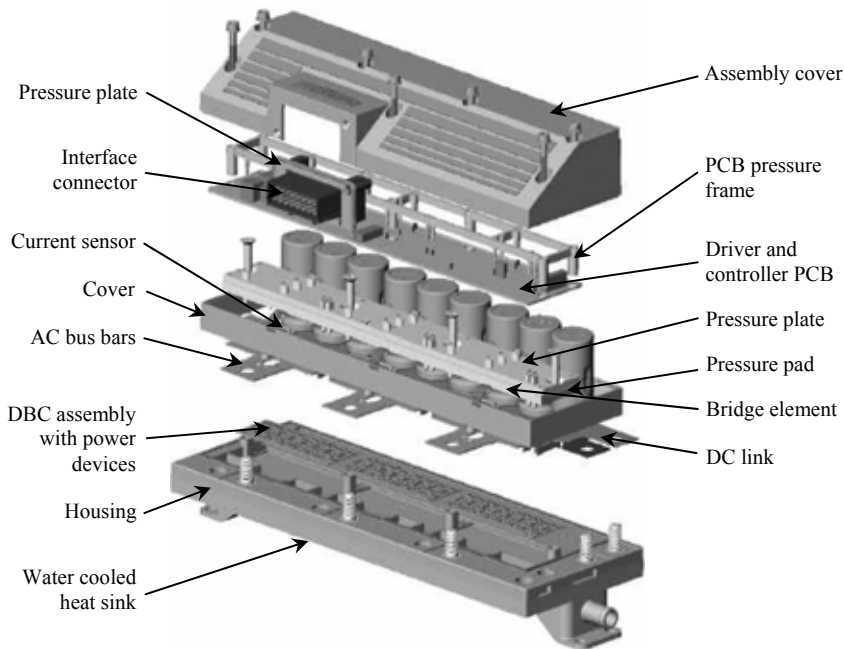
Exploded view of the SKAI ISM inverter developed for the automotive industry [2-22]
